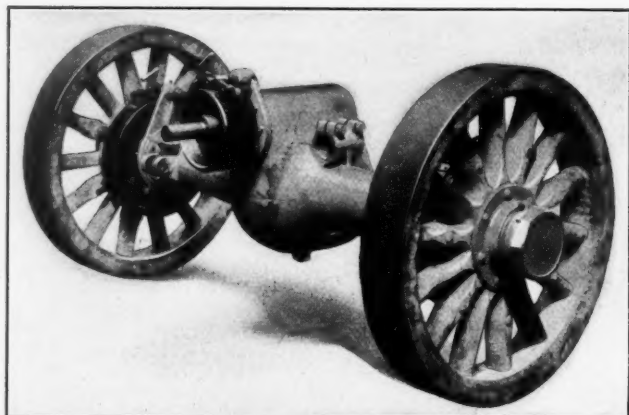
Motor Truck Axle with Central Spiral Gear Drive
